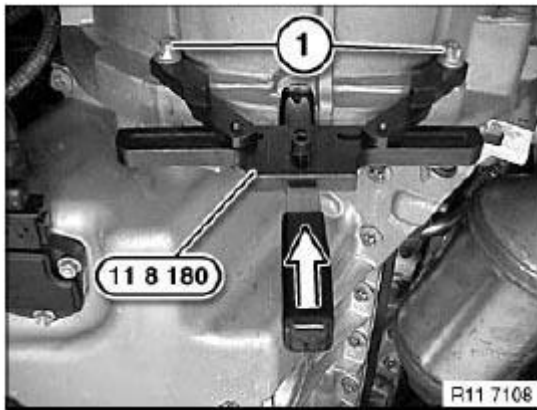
Identifying Special Tool 11 8 180 And Manual Transmission Bolts
